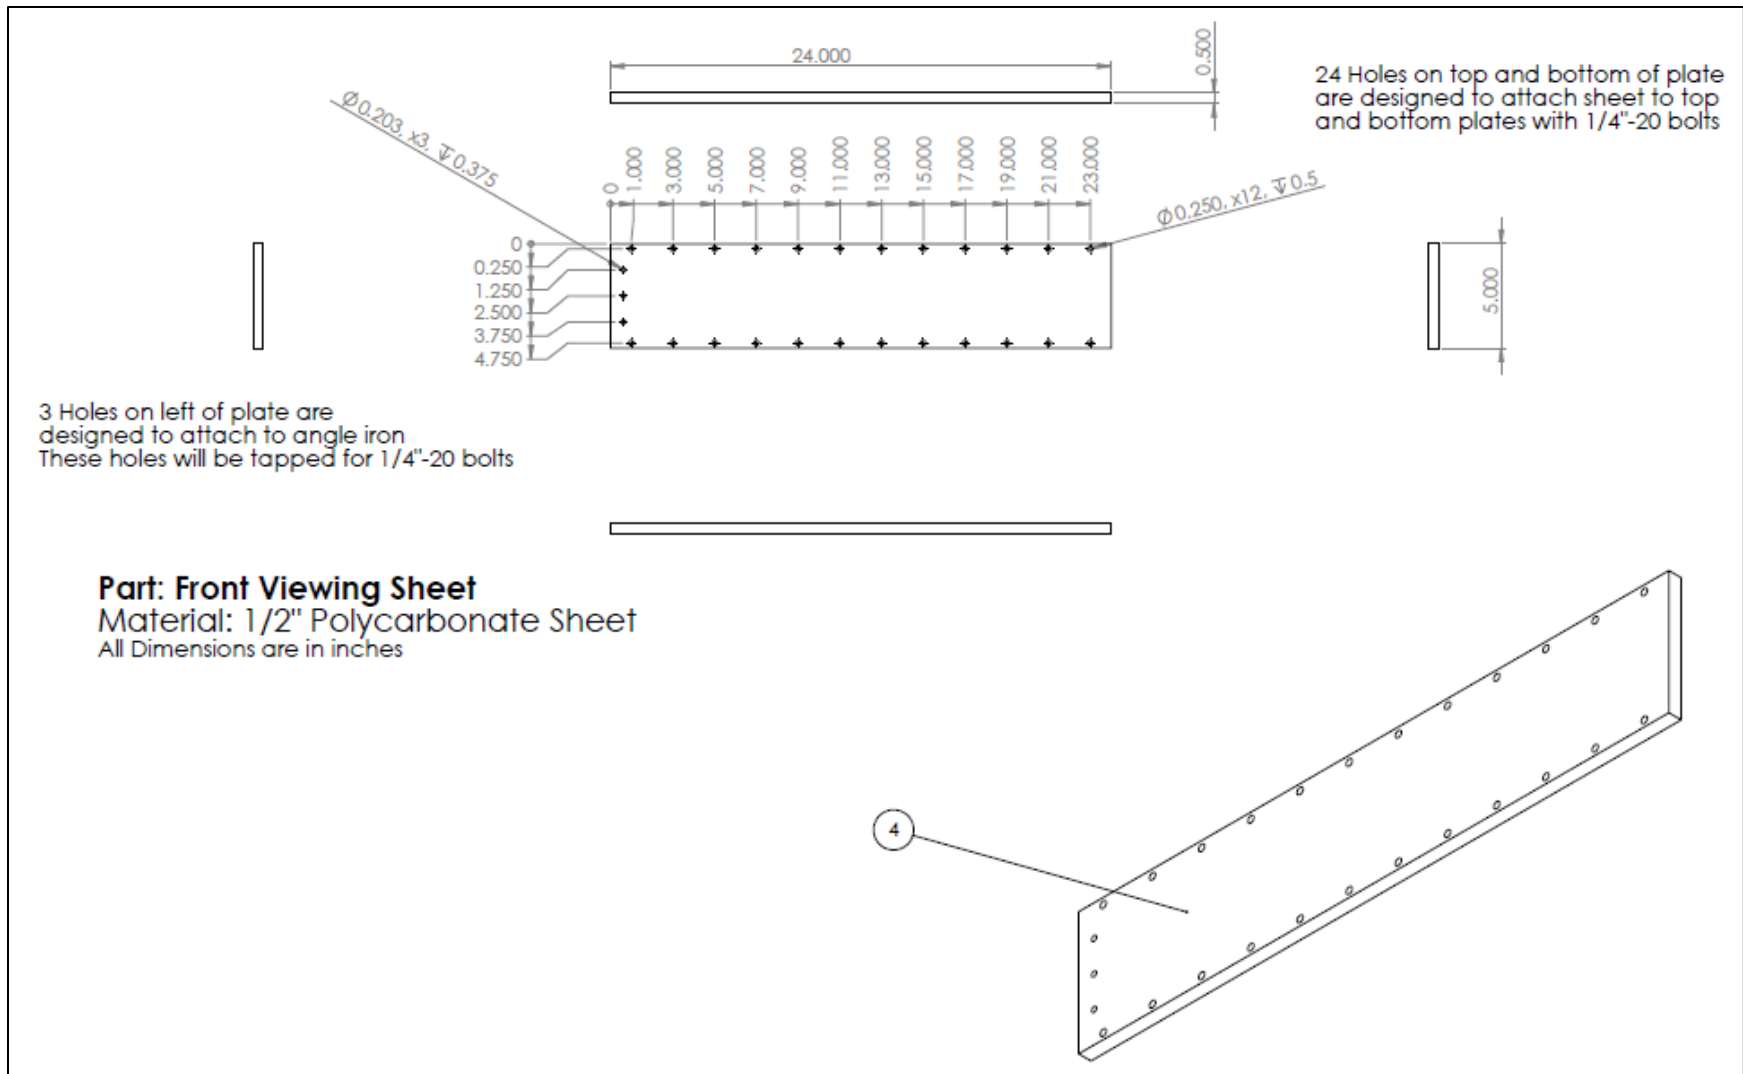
Final Front Plate Design Technical Drawing for Cavitation Tunnel
